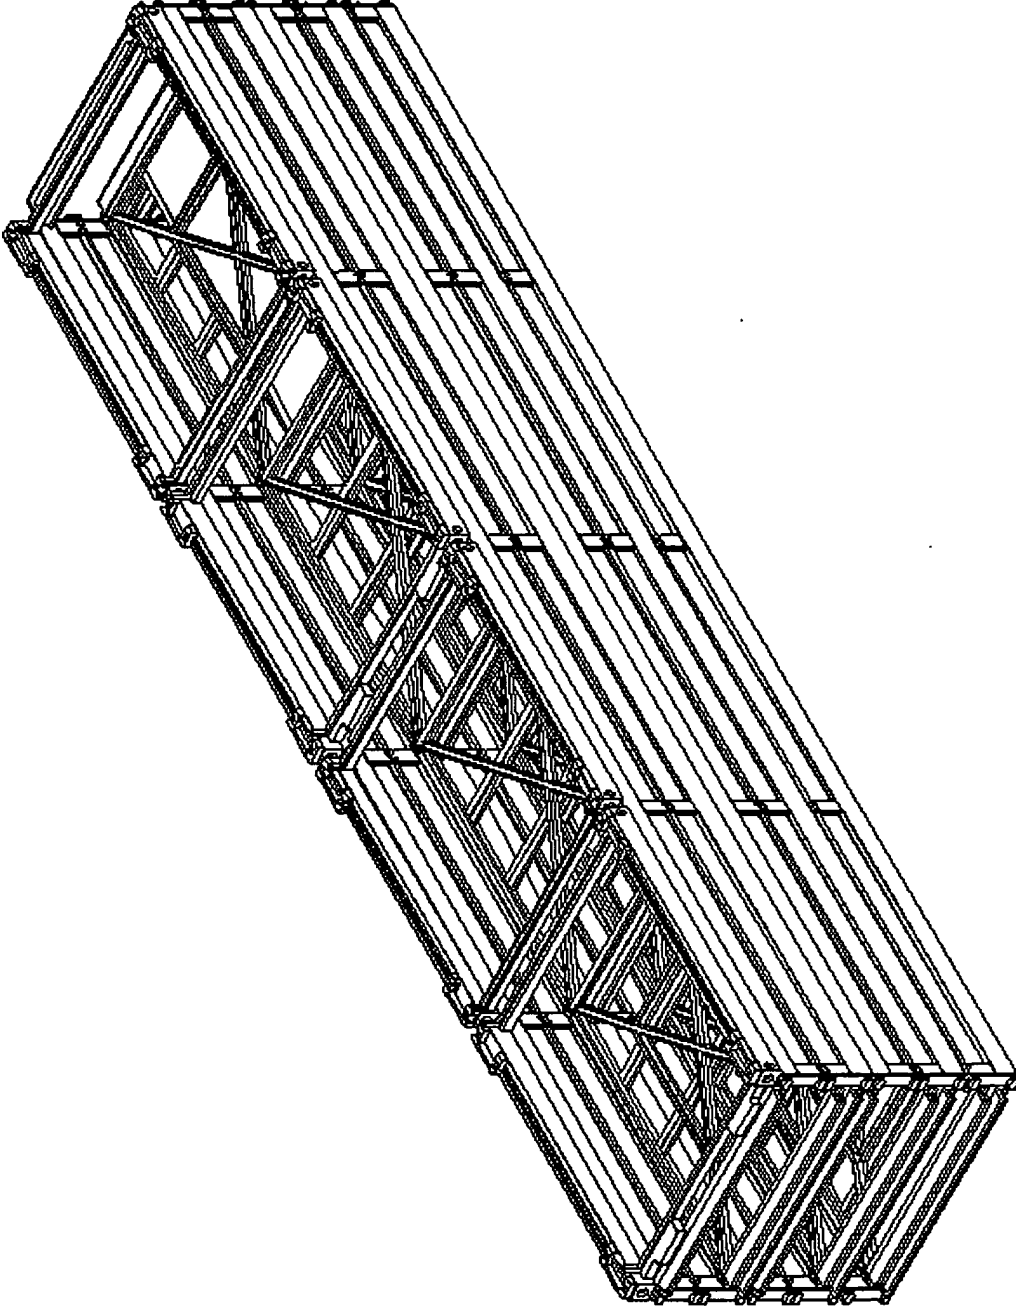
B: Step4 of disassemble and load process: The left and right frames from 2 disassembled cargo containers are stacked on top of the previous assembly.
